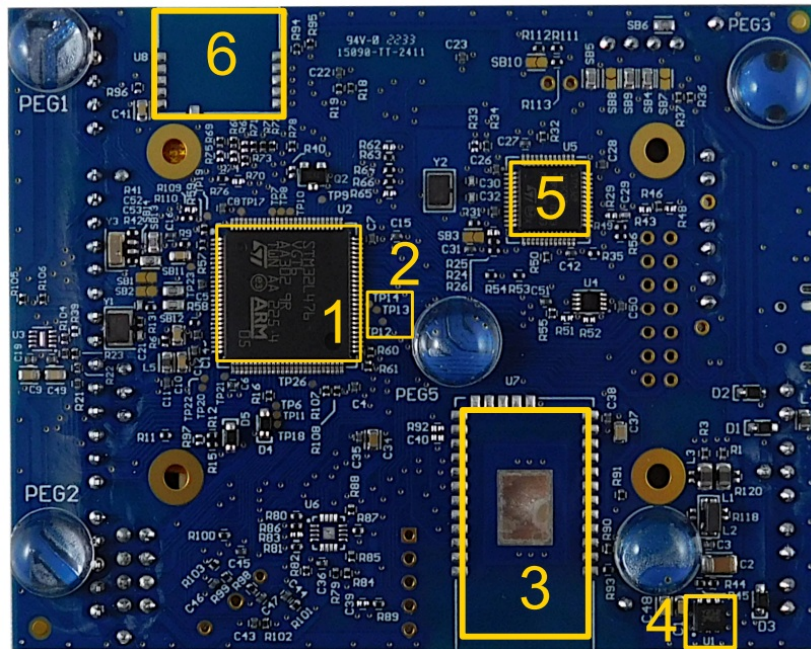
STEVAL-25R3916B main board layout (bottom view)
